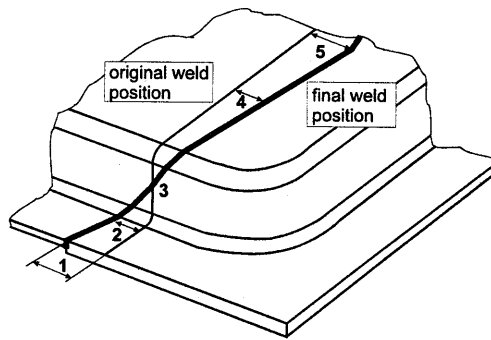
Definition of the weld displacement measure points for the deep drawing product (point 1' to 4' are mirrored on the other side)
